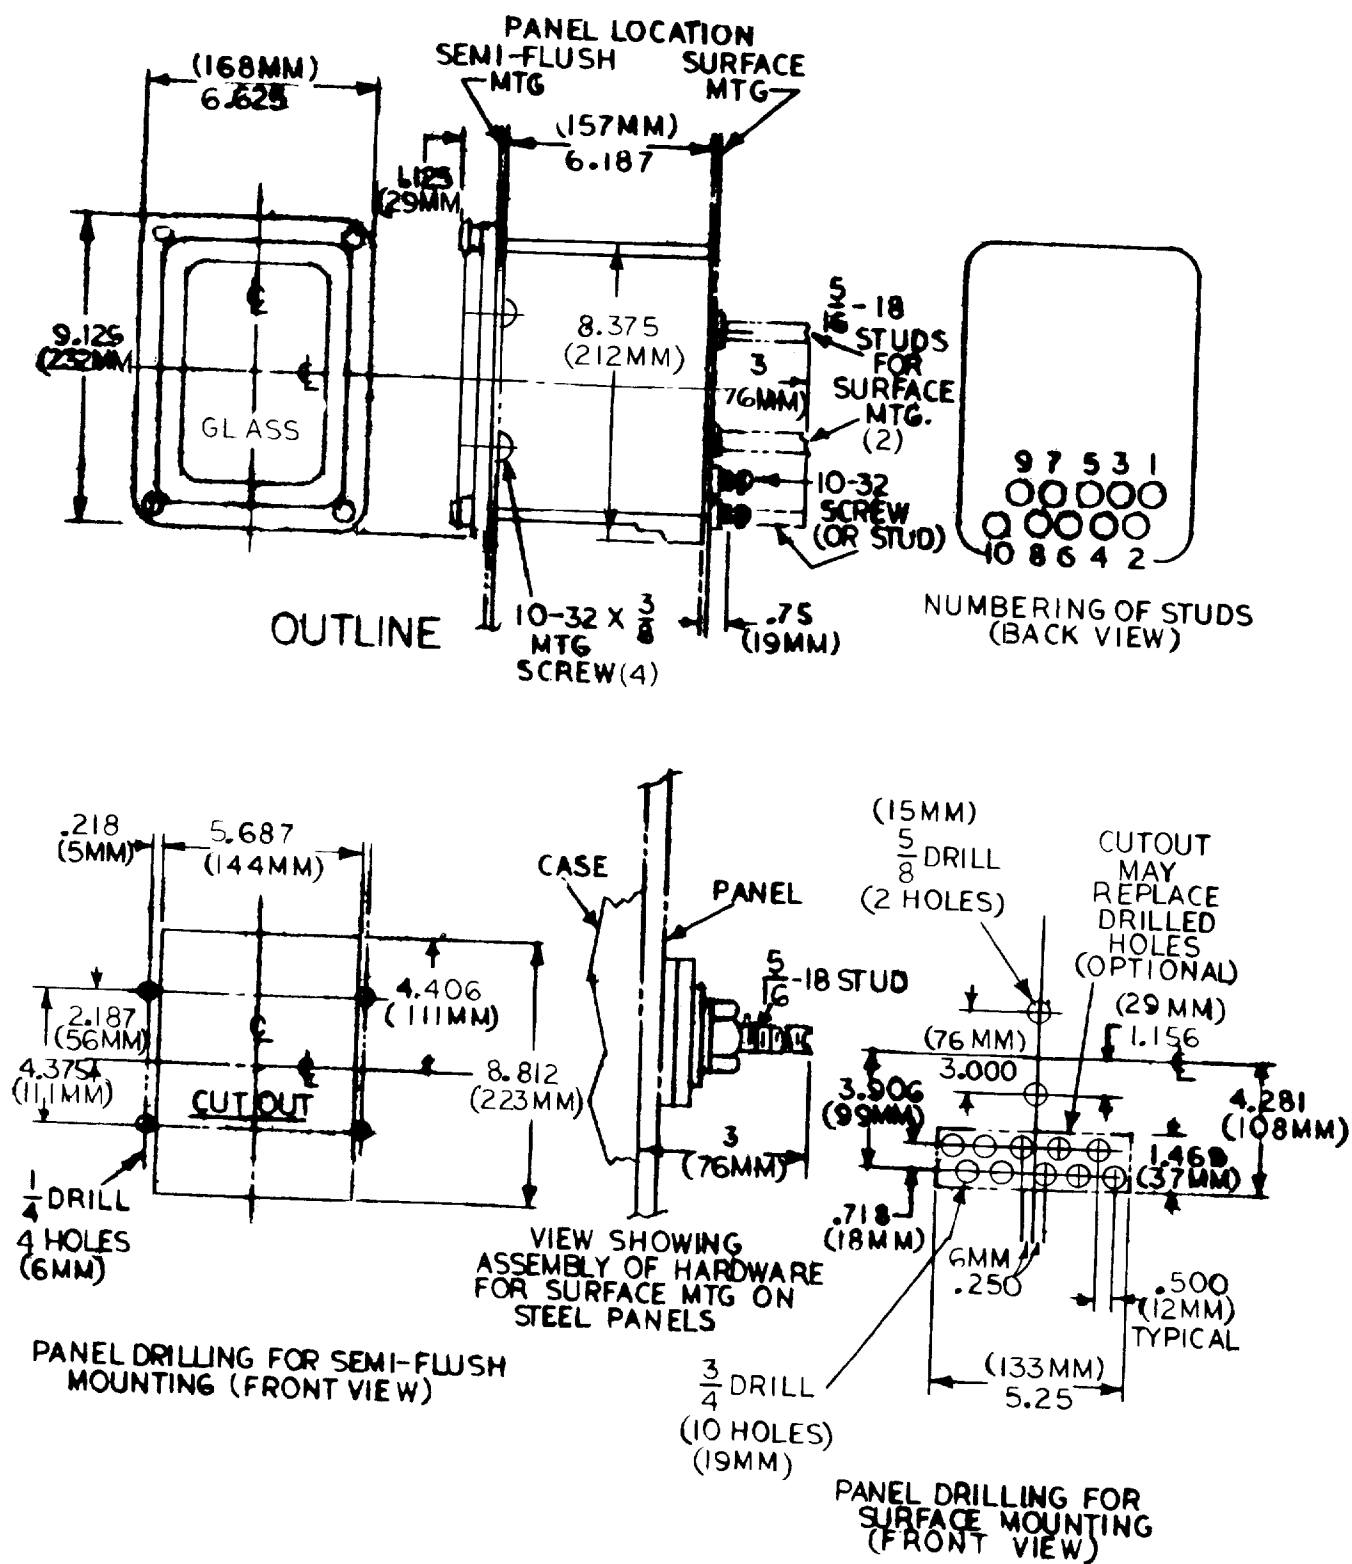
Outline & Panel Drilling Dimensions for Type HGA17J Relay.
